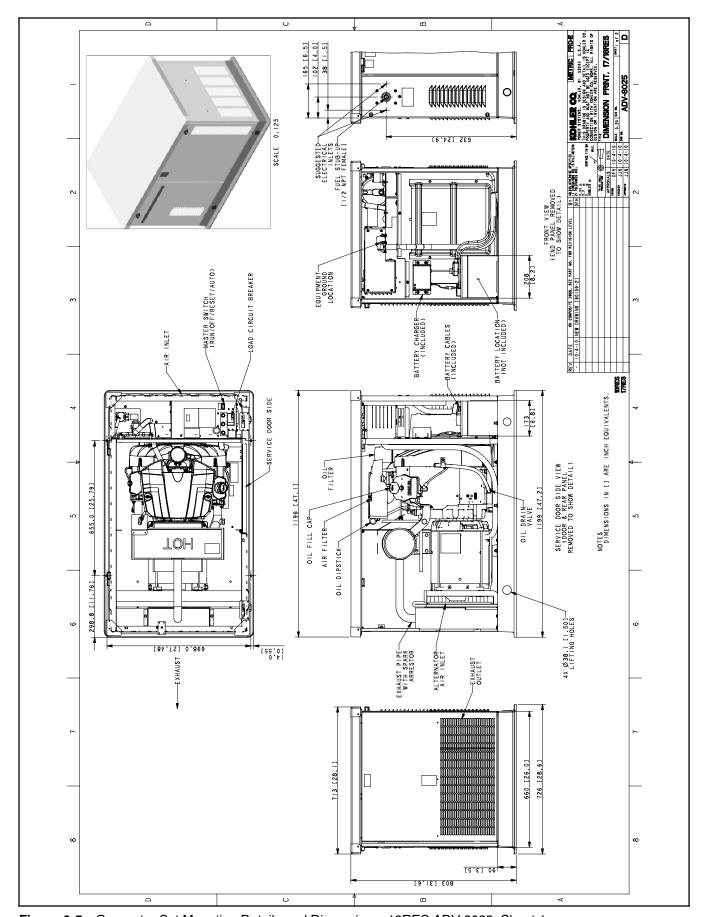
Generator Set Mounting Details and Dimensions, 18RES ADV-8025, Sheet 1
